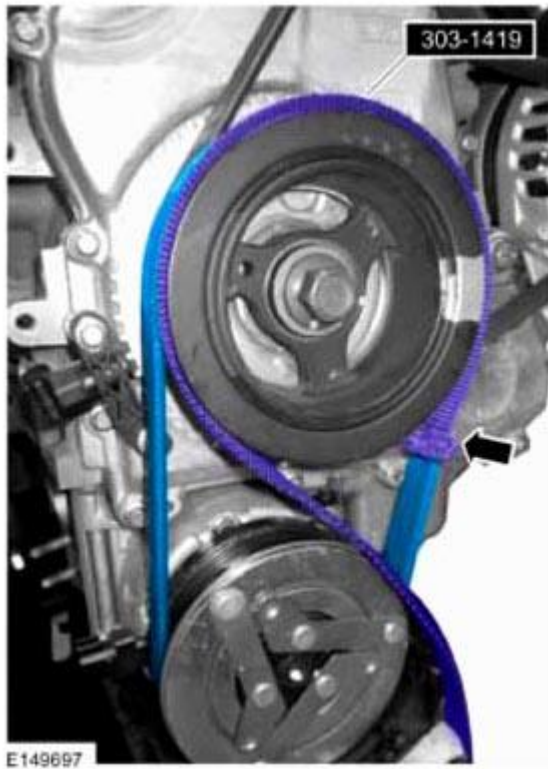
Rotating Crankshaft Until Special Tool Is At Approximately 5 O'Clock Position
